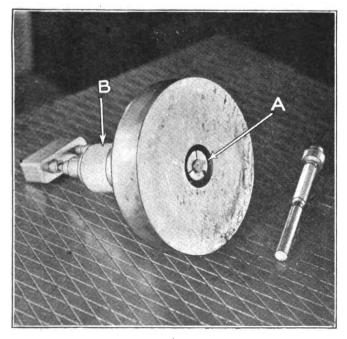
BOTTOM OF SPINDLE END LAPPING JIG
